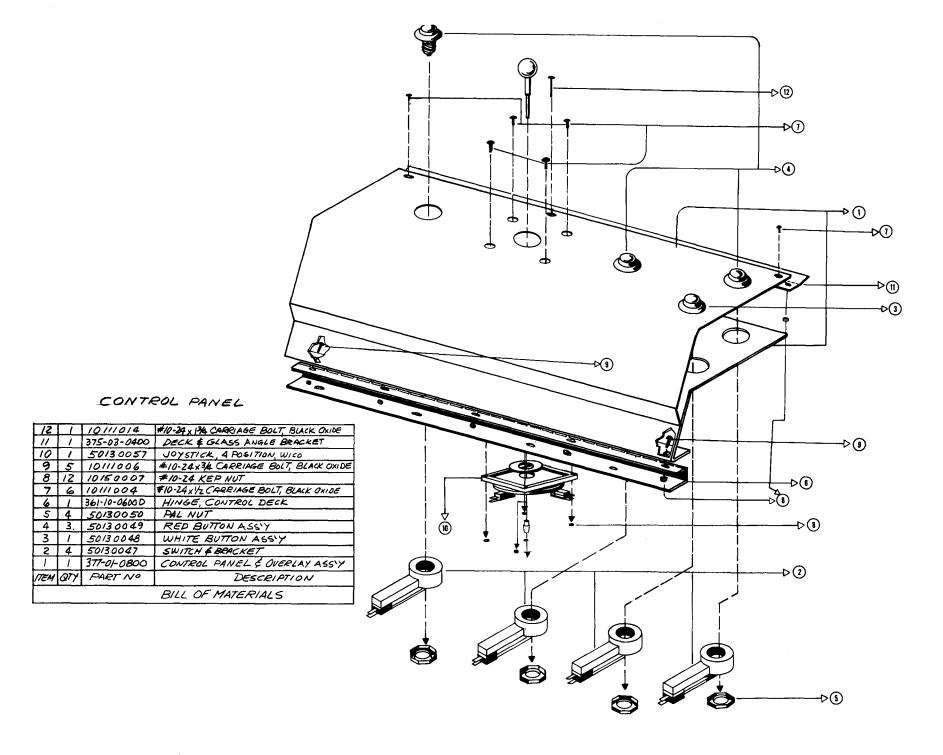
EXPLODED VIEW OF JOY STICK ASS'Y.
